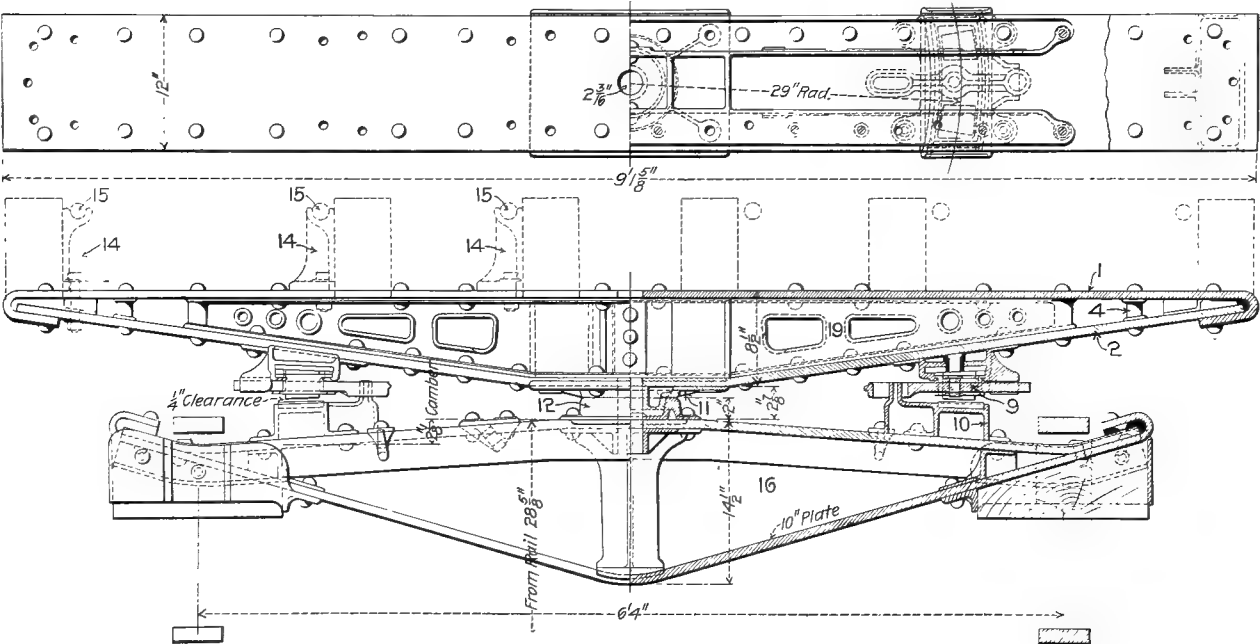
"Simplex" Body and Truck Bolsters with Susemihl Roller Side Bearings. American Steel Foundries.
